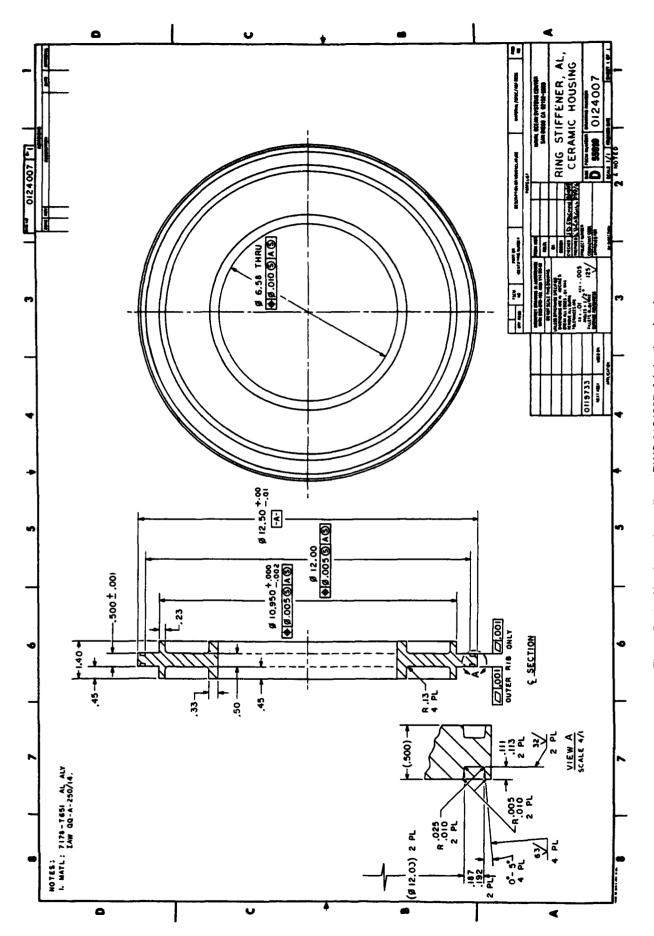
Aluminum ring stiffener DWG 0124007; fabrication drawing.
